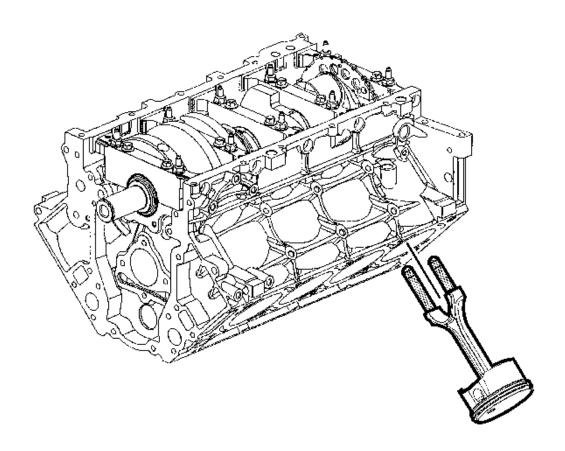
Piston, Connecting Rod & Cylinder Bore Courtesy of GENERAL MOTORS CORP.
